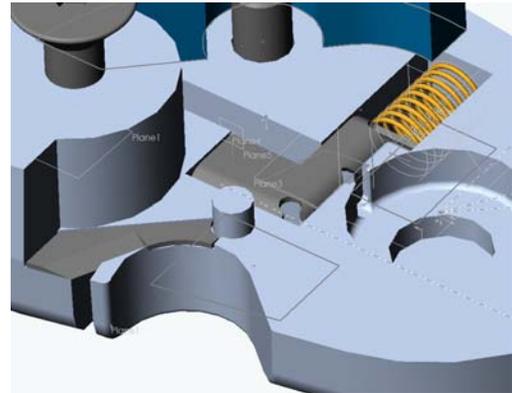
Internal cutaway view of Suture Cartridge III solid model, showing the external cutter (left) and the internal cutter parts (right) constructed of sharpened 0.010" sheet metal stock. The internal cutter uses a spring identical to the pawl return.
